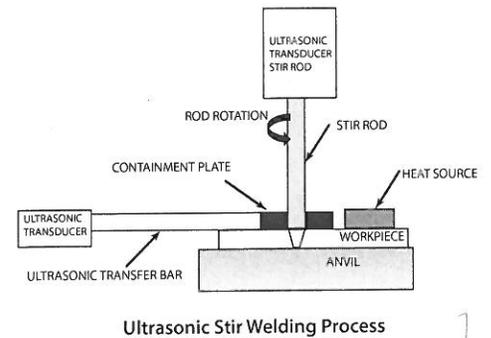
FIGURE – Diagram of the basic components of the Ultrasonic Stir Welding technology
